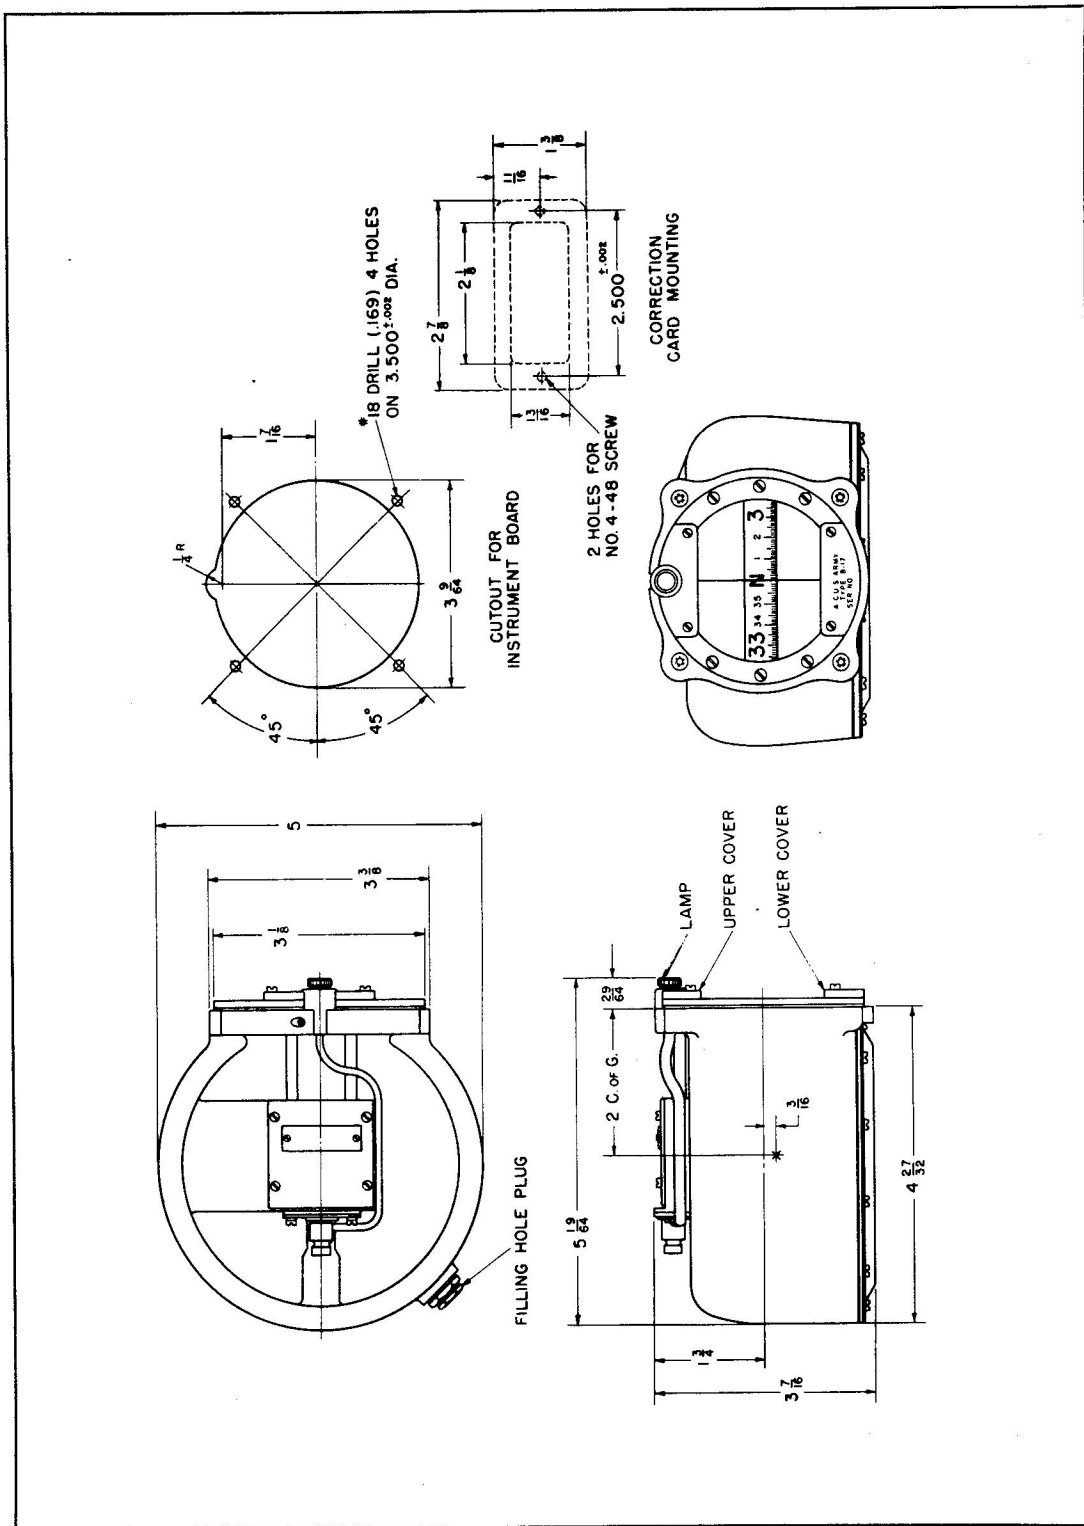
Dimensional Drawing - Type B-17 (Pioneer Types 1813-1-A and 1813-1-B)
